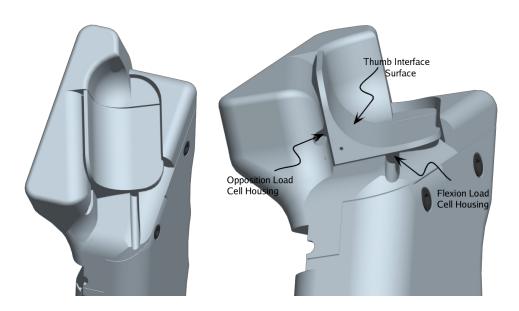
Detail of thumb load cell packaging; Top View (left) and Back View (right)
